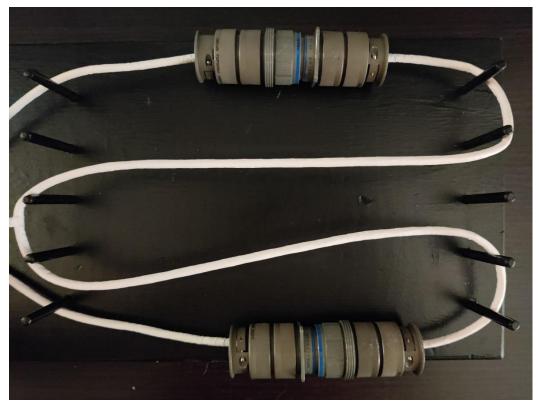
PIC Ethernet Cable with PIC Connectors in Bend Fixture with Three Bends, each with a Bend Radius Greater than the 4x Cable Diameter Requirement for Ethernet Cable
